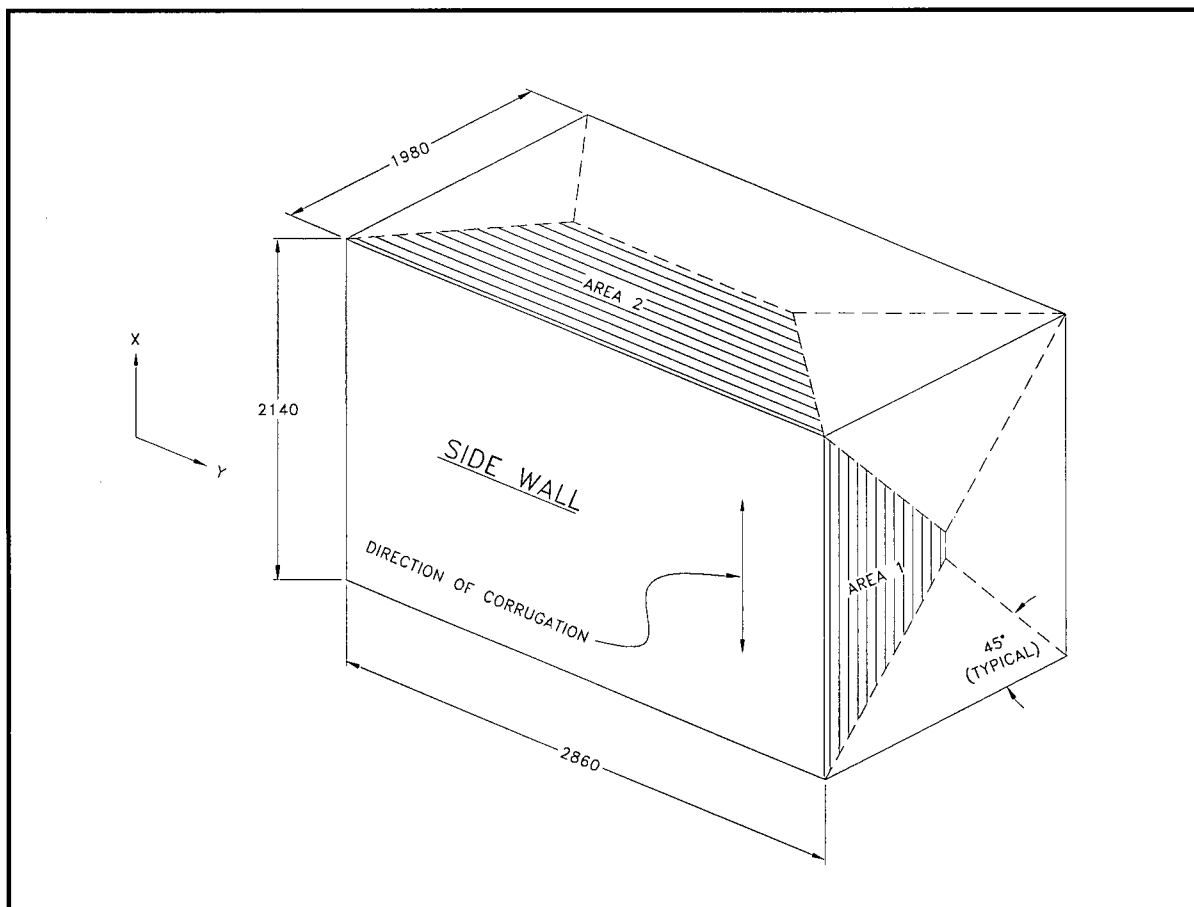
View of Sidewalls and Adjacent Panels Showing Areas Used to Calculate Edge Loads
